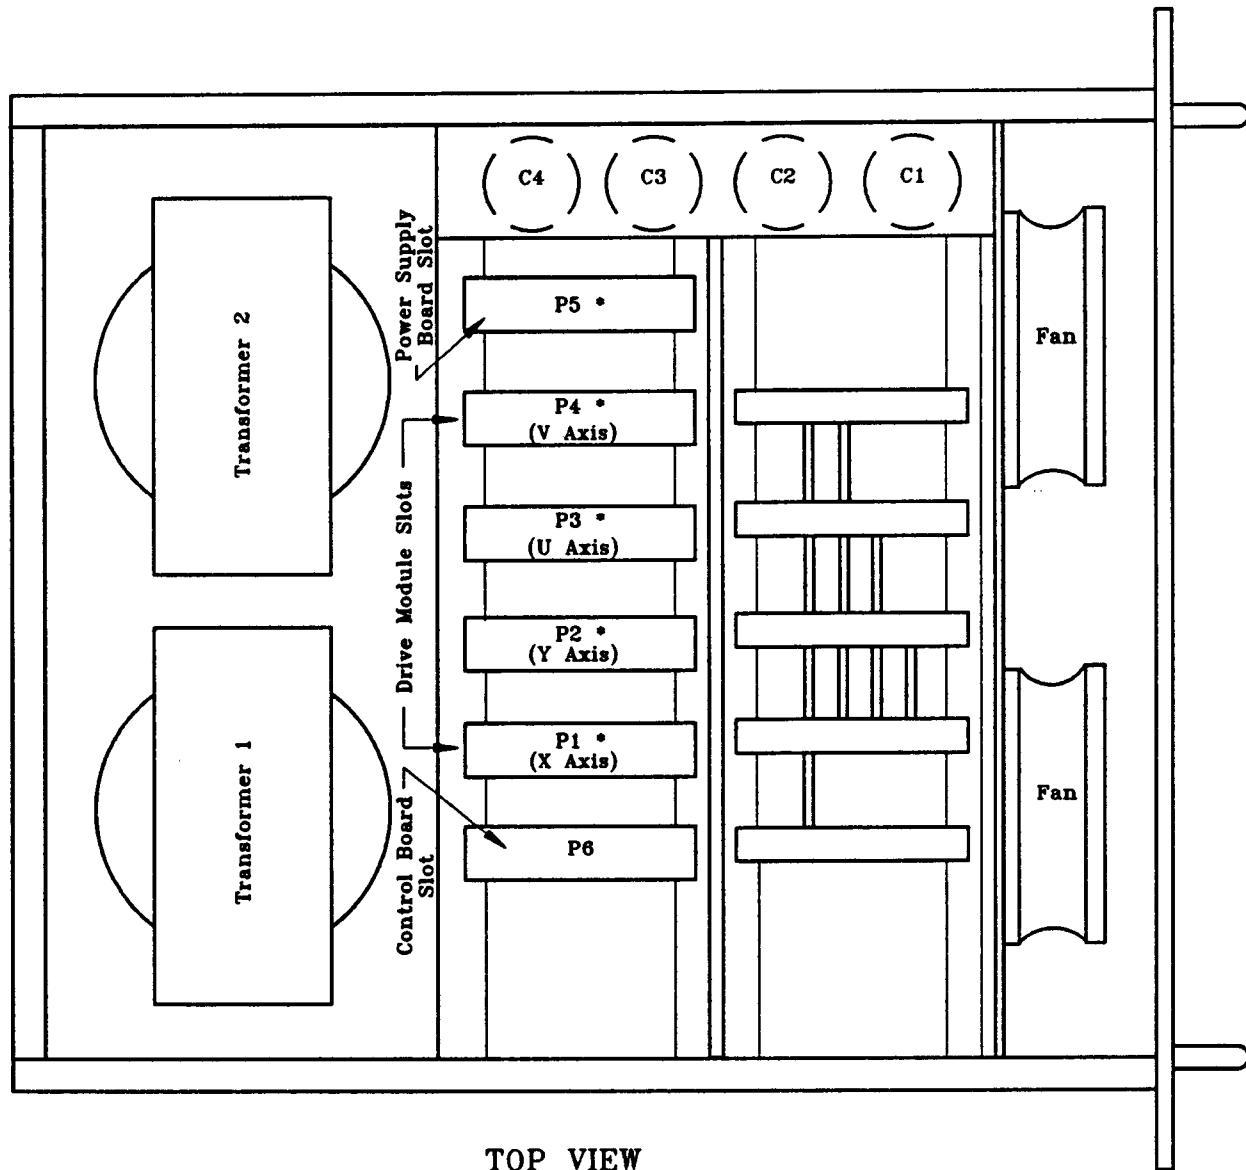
Outline of the U11S and U11R Chassis with Front Panel Removed
